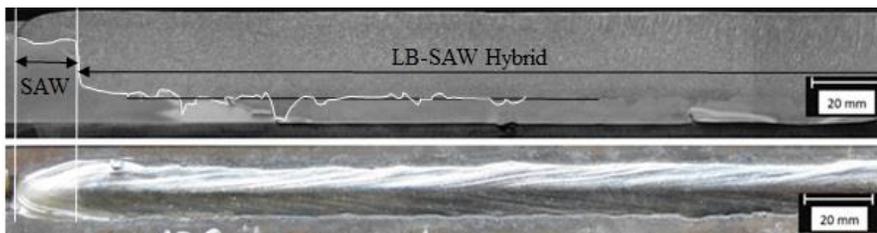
(Up) Fluctuations in depth of penetration of longitudinal cross section weld F; (Down) Weld seam surface
